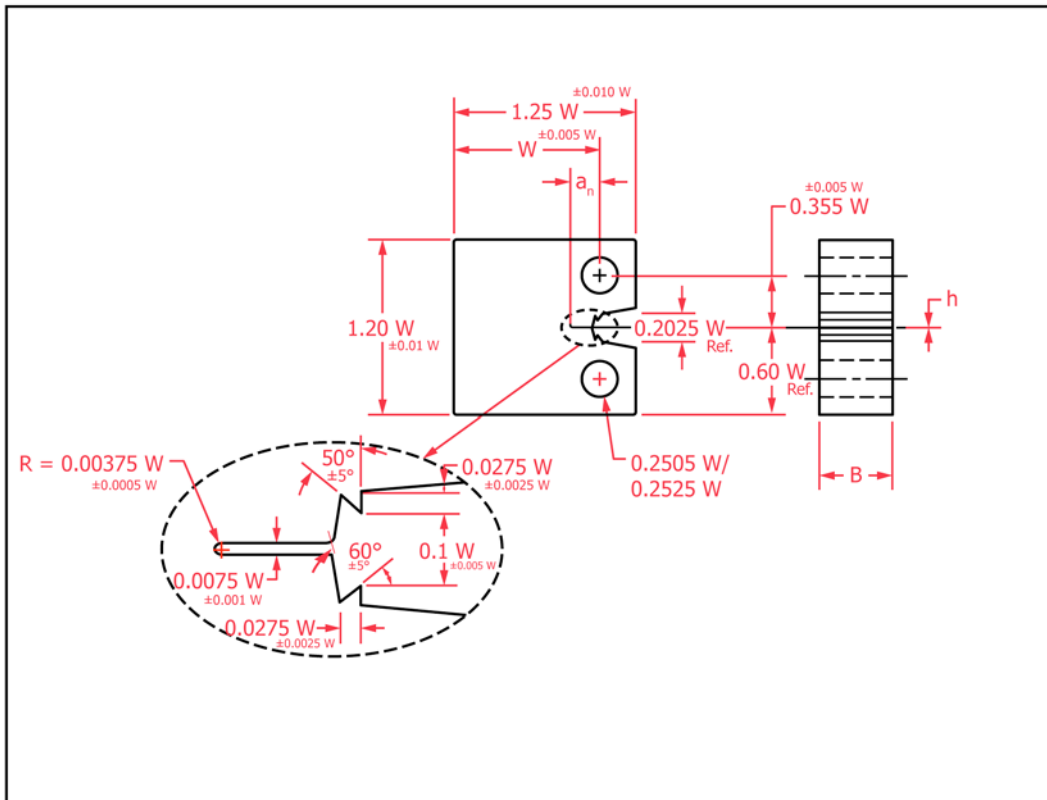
Drawing of a C(T) Specimen Recommended for Creep-Fatigue Crack Growth Testing and the Details of the Machined Notch and the Knife-Edges for Securely Attaching the Extensometer
